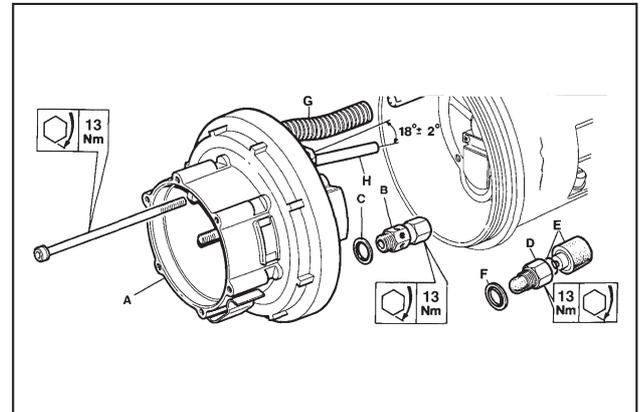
Pressure Control Valve and Oil Return Valve
